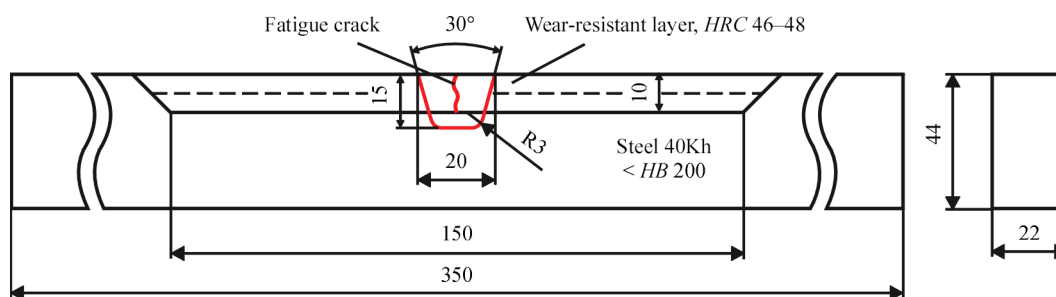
Scheme of preparation of metal damaged by fatigue cracks
